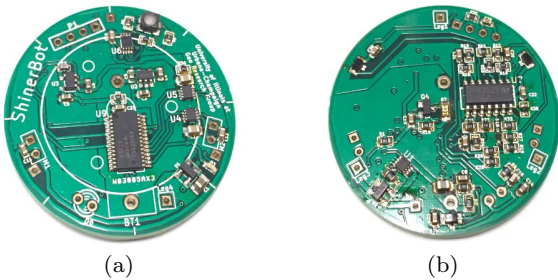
Shinerbot PCB (a) top view; (b) bottom view.
